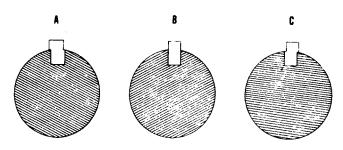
C-44. Camshaft Key from the Gear Cover End NOTE
